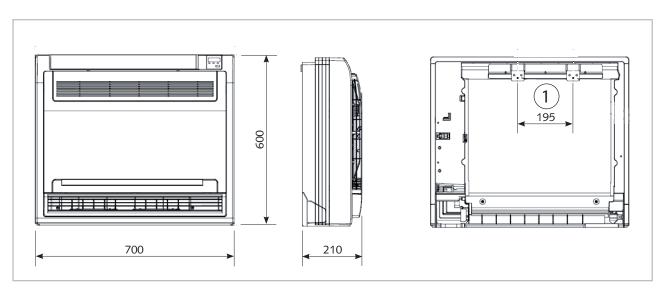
Unit dimensions MXV 221-451 (All measurements in mm)
